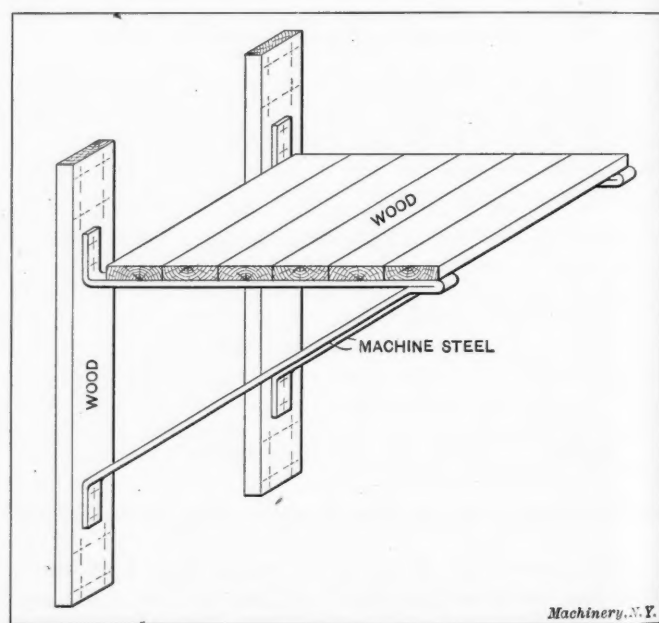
Bracket for Brick Wall made of Bar Machine Steel and Wood, for Heavy Motors
